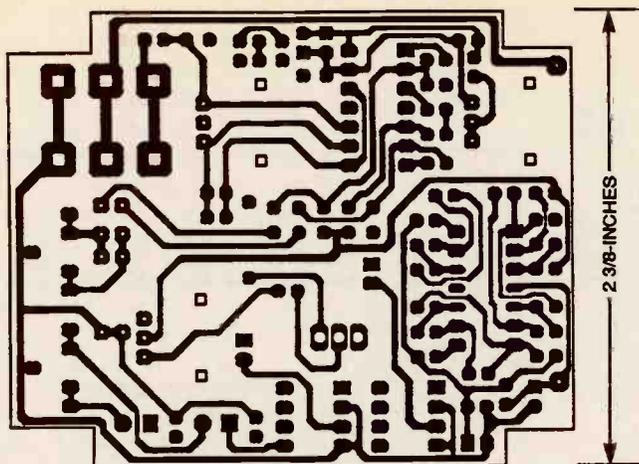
Use this template to etch the component side of the printed-circuit board. The pattern is shown here in its full size of $2\frac{3}{8} \times 3$ inches.
